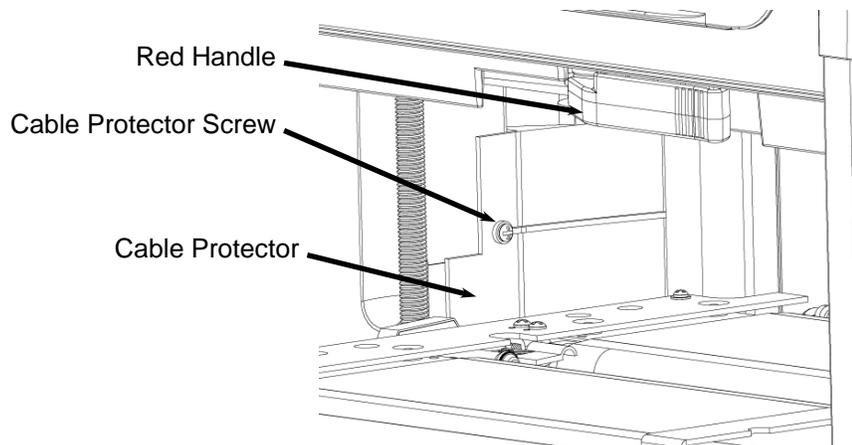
LOCATING THE HEAD CONNECTOR BOARD
